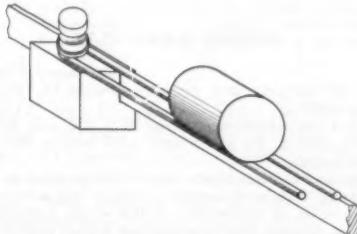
Detail drawing of the speed-control for bugs or semiautomatic keys.
